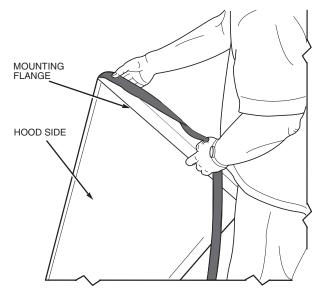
Adding Seal Strip to Sides of Hood Top Mounting Flange
